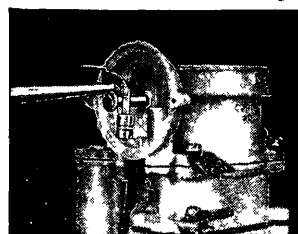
Install air horn and piston housing on body. Then install choke piston lever, link and shaft
